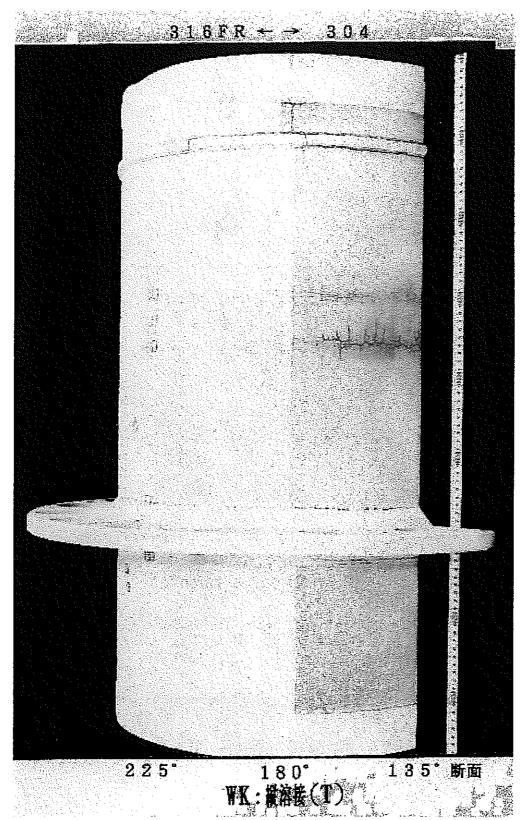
Photograph of initiated cracks on the surface of the inner vessel after 1055 cycles (SUS304-316FR 135° - 225° ref: Fig.A4.1)
